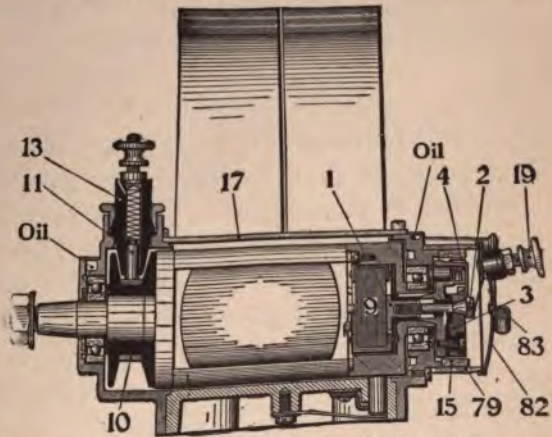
Longitudinal section of high-tension magneto for a single-cylinder engine
